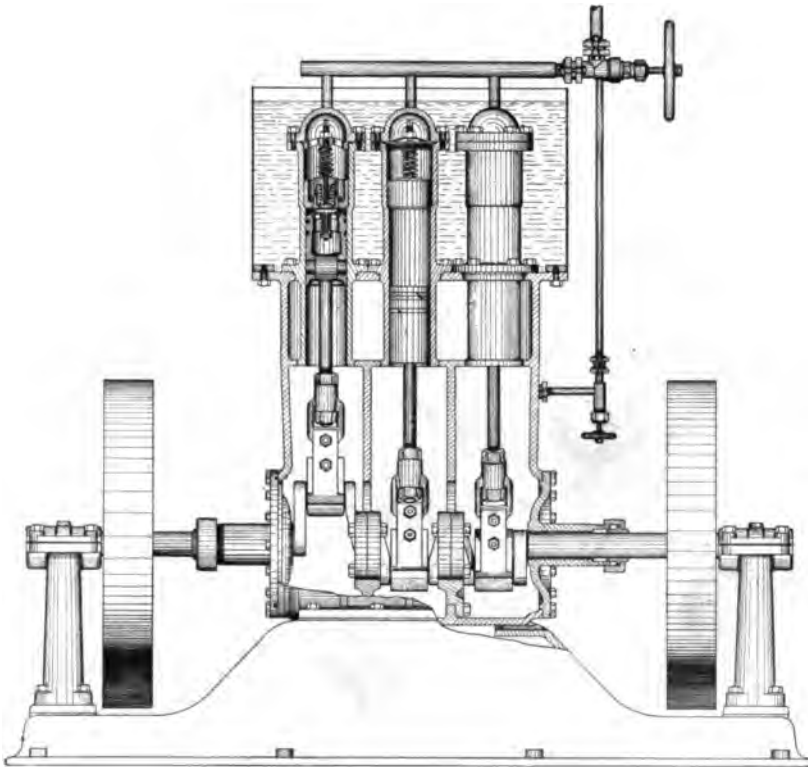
THE CHALLONER TRIPLE CYLINDER, SINGLE-ACTING COMPRESSOR SECTION.
